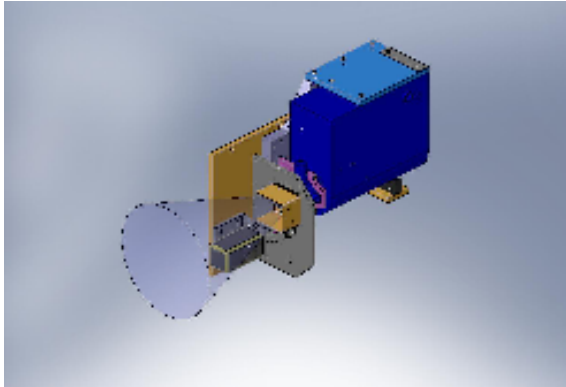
MicroCATII Kevex Mounting Assembly w/ existing X-ray Shutter.
